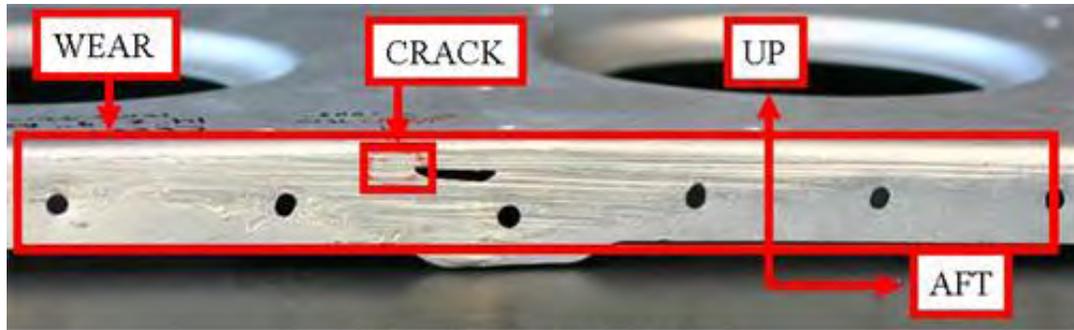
Macroscopic View of Crack 3 on the Left Front Spar Attachment FS 104.68
